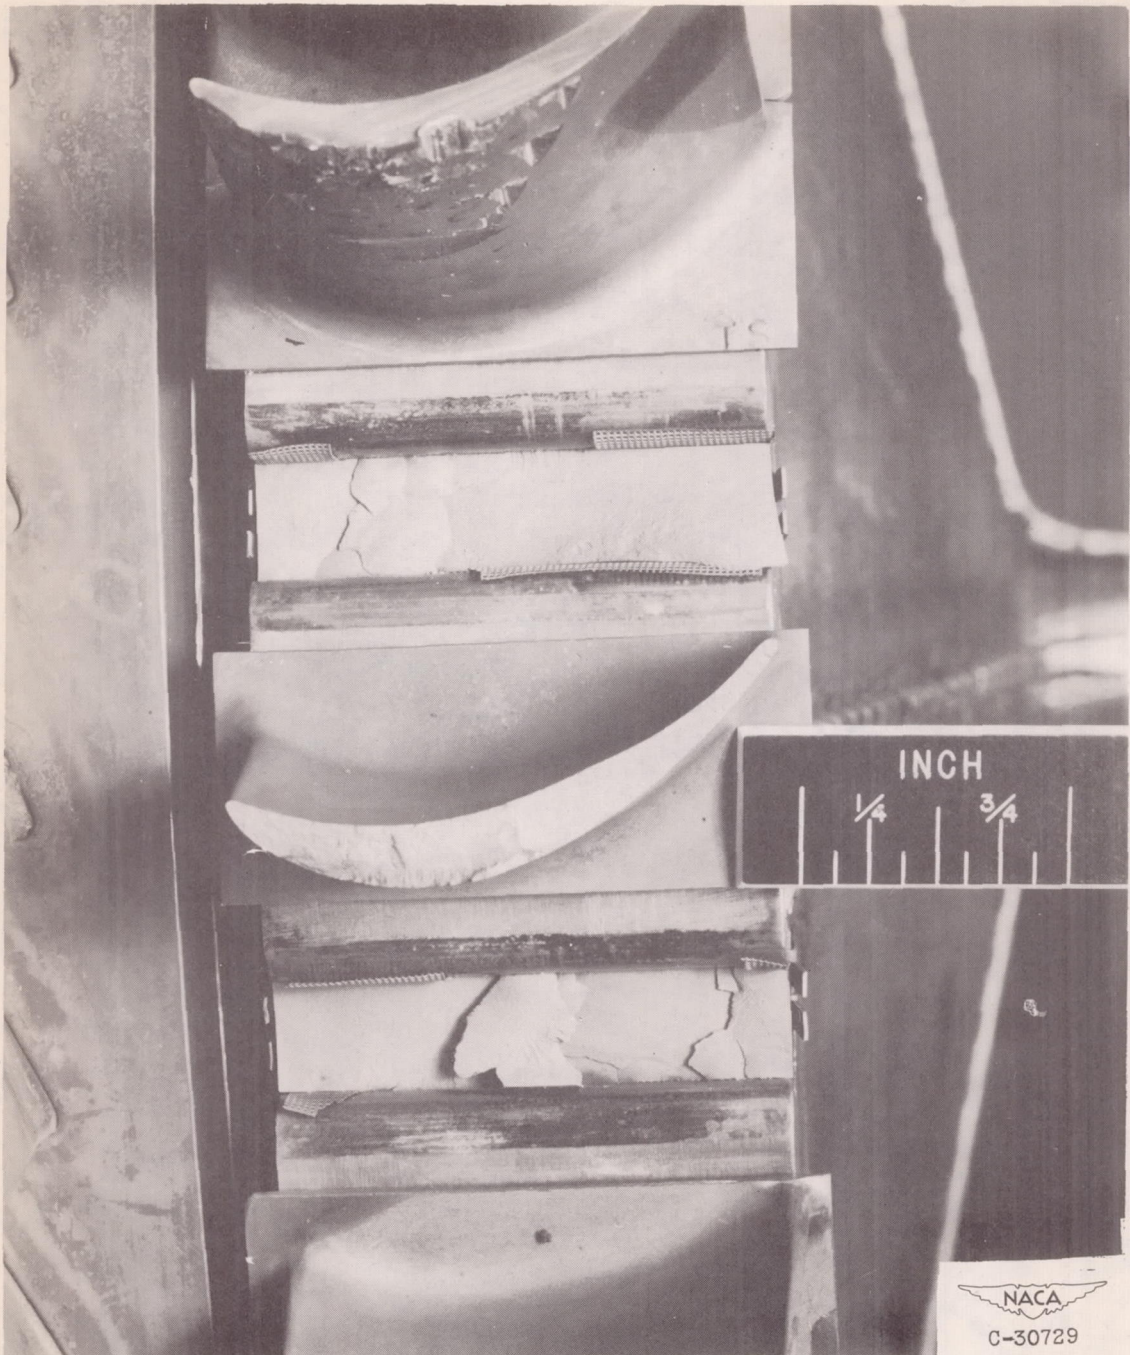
Fracture surfaces of dovetail roots; run 15.
